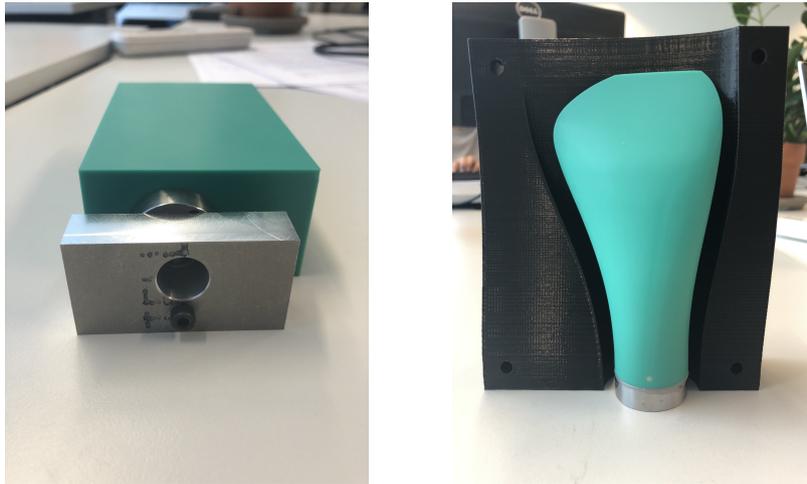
Alignment used for gluing steel insert and blade plug raw material (left) and final blade plug with alignment jig for better interpretation (right)
